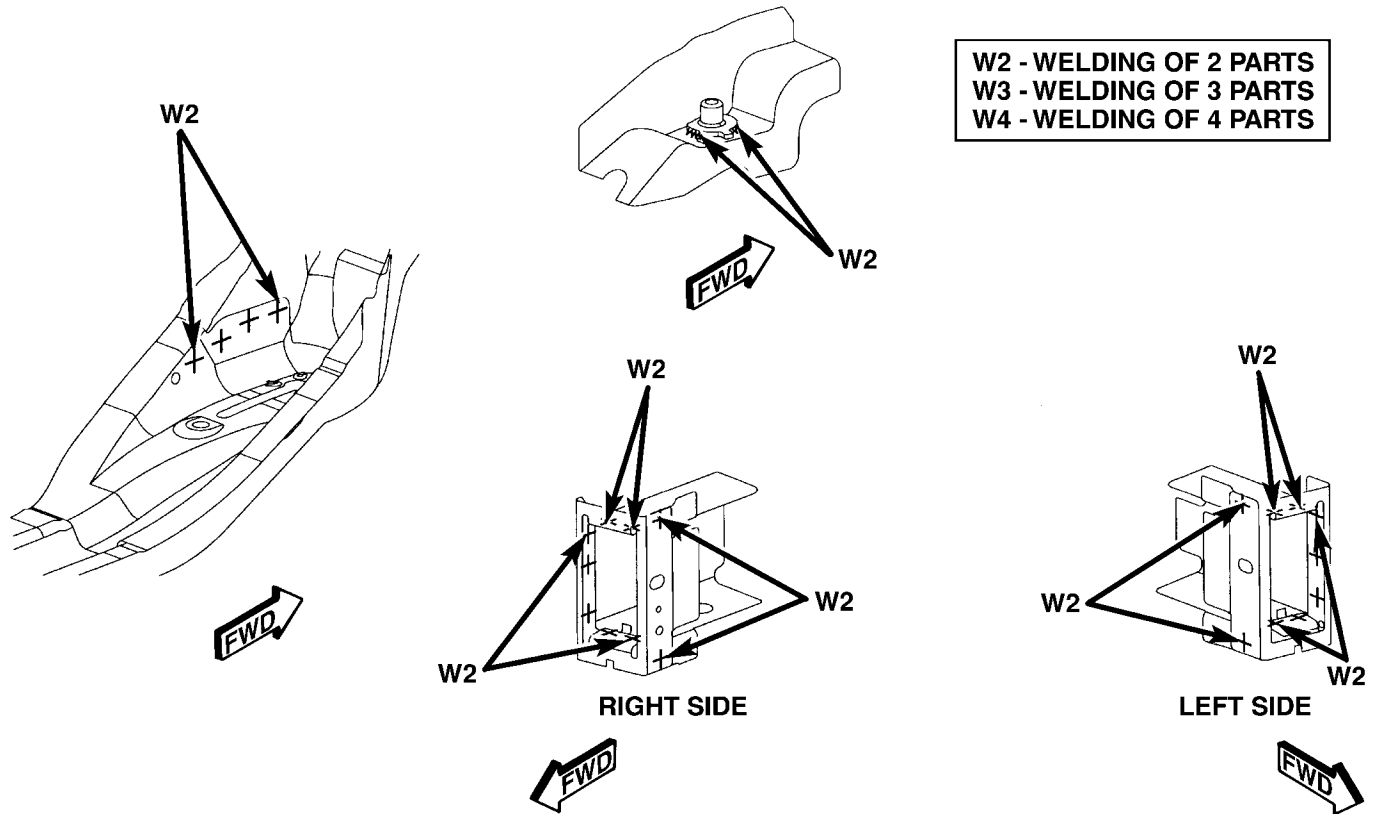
BUMPER EXTENSION TO FRONT BUMPER MOUNTING BRACKET FRONT SIDE RAIL PLATE TO FRONT SIDE RAIL
